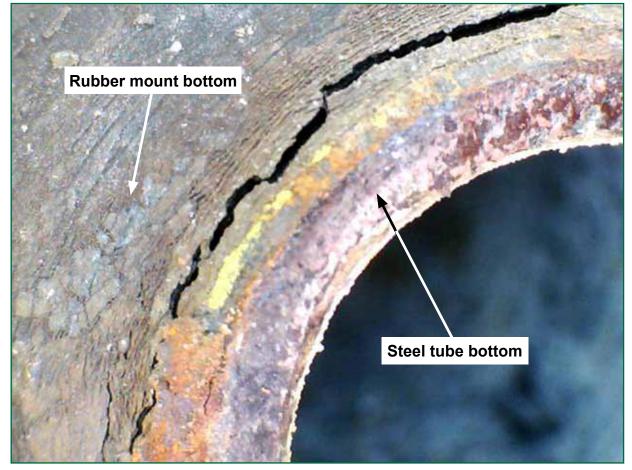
Imperfections of the steel tube and the bottom face of the rubber mount allowing moisture to reach the bolt threads
